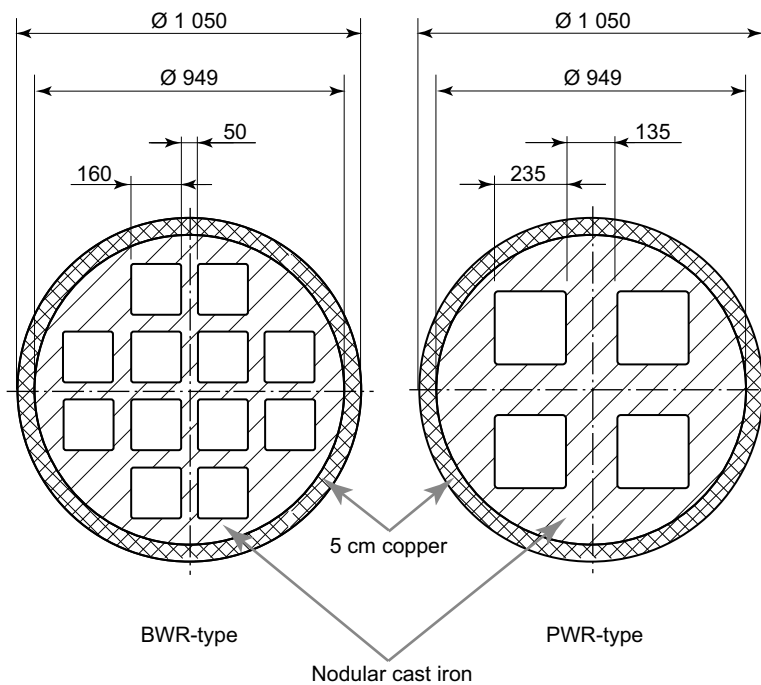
Dimensions (in mm) of the cross section of the BWR and PWR inserts.
